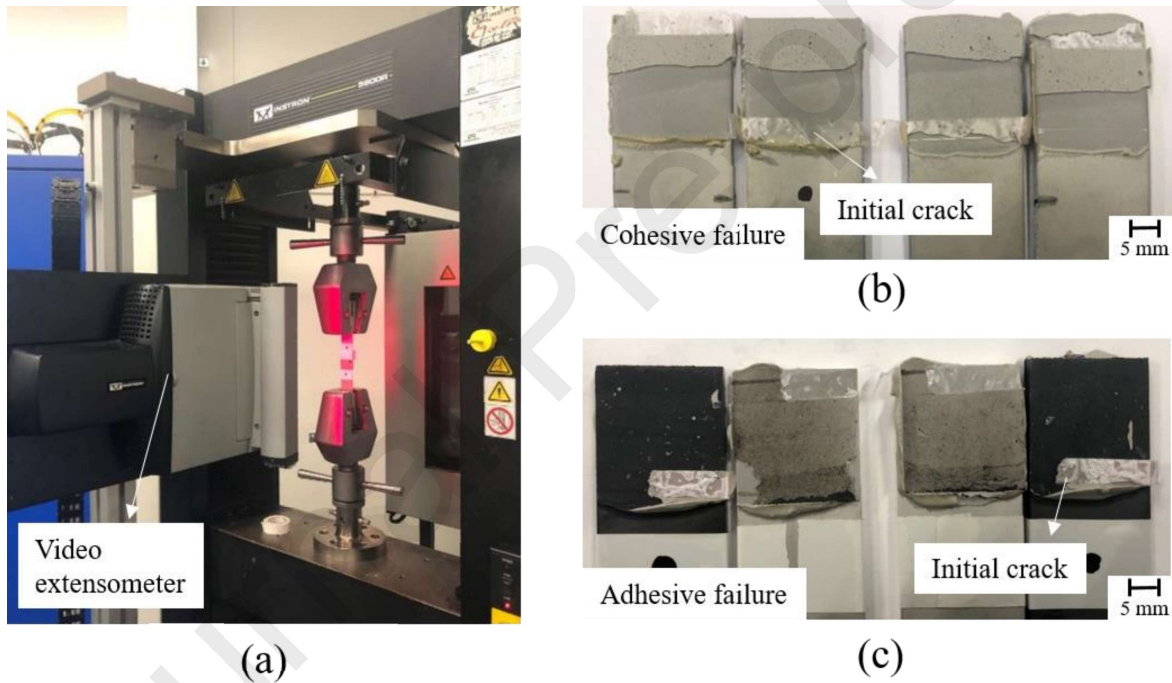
(a) The setup of the test machine with video extensometer, (b) the failure modes of identical Al joints and (c) hybrid Al-PPA joints.
